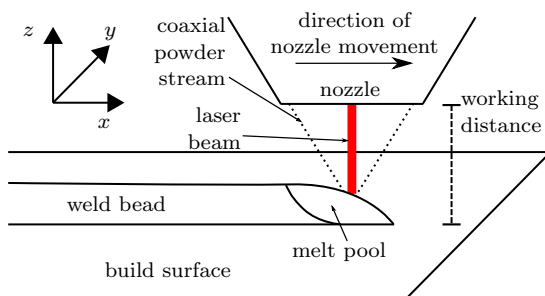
Sketch of a DED processing head with laser source, coaxial powder feeding nozzle, and resulting weld bead.
